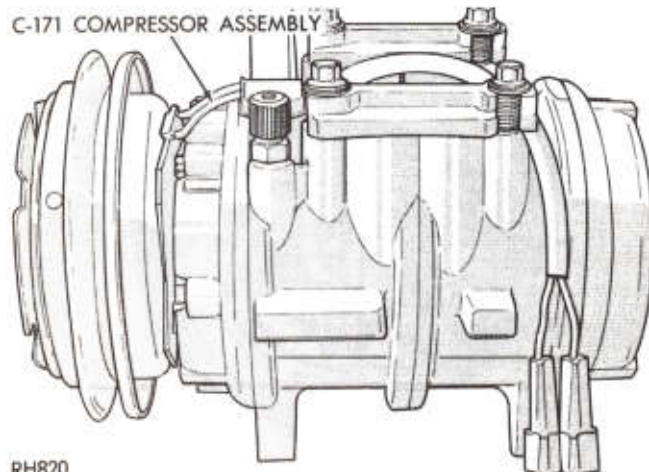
A/C Clutch Assembly, C-171 Compressor
